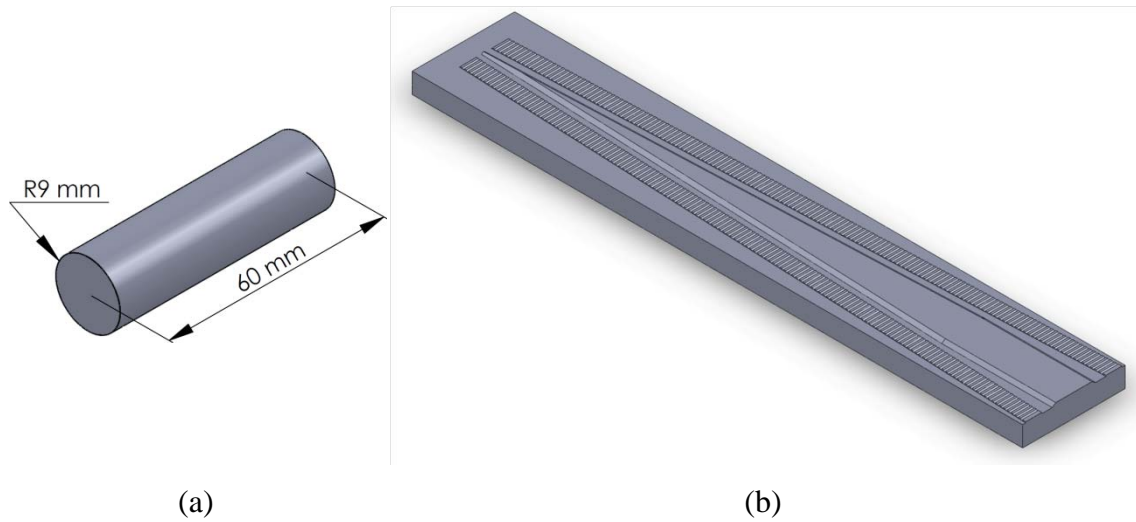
(a) The workpiece and (b) Tool-1 designed for experimental verification of JC materials models of AISI 1045 steel and Ti6Al4V.
